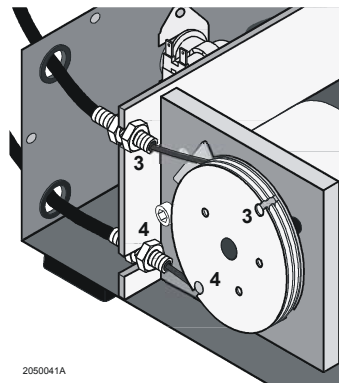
6 How to connect the wires inside the Drive Unit (DU)
